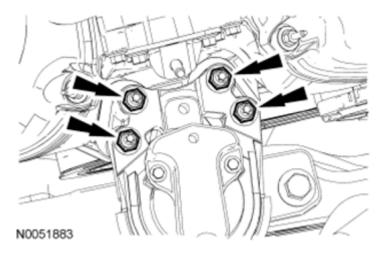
Locating Engine Mount Nuts Courtesy of FORD MOTOR CO.
